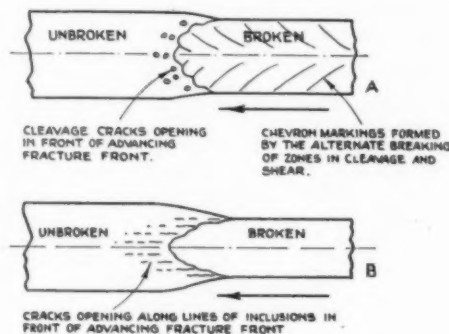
(a) Brittle-type fracture; (b) fibrous-type fracture.
